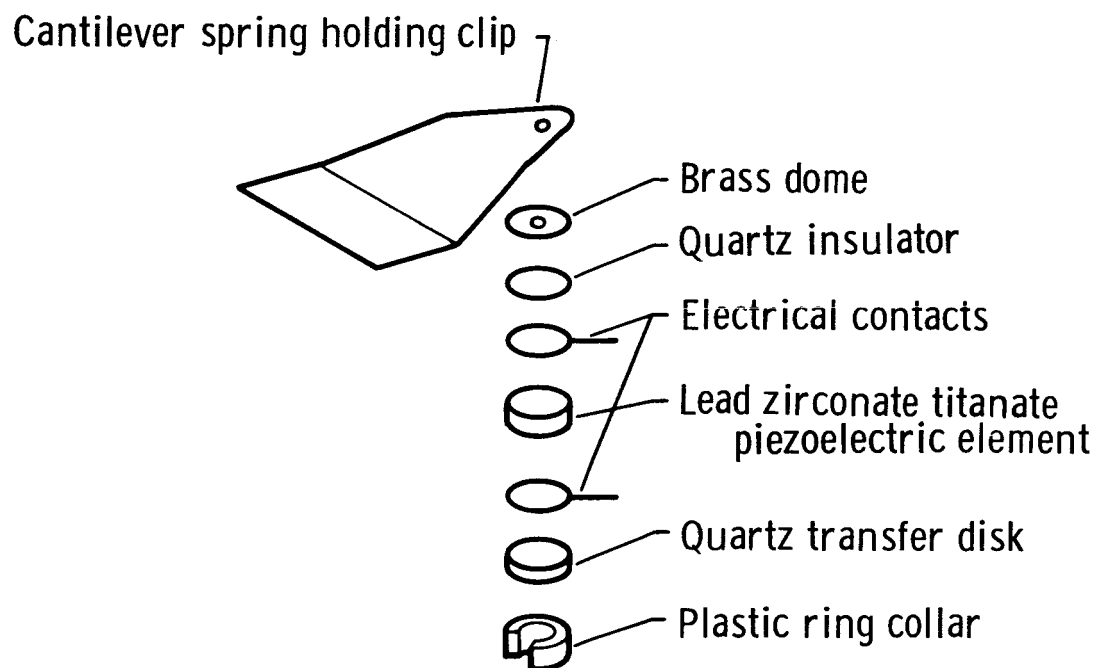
Exploded view of piezoelectric impact-detector assembly.
